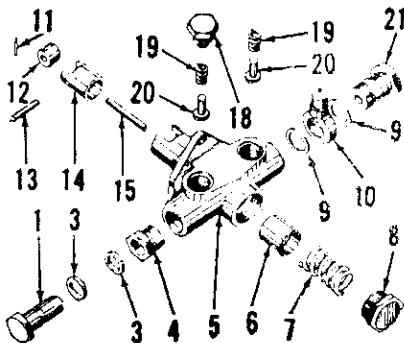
Exploded view of fuel pump shown in Fig. 61. Hand primer lever is not shown.
